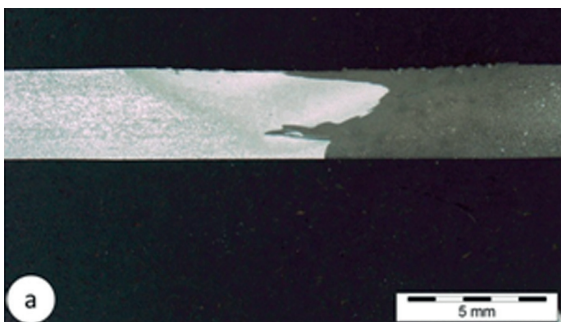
FSW weld macrostructure presented according to the heat input.
